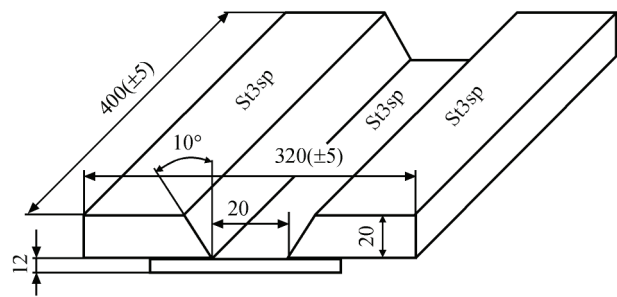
Butt joint preparation for cutting out weld metal samples in keeping with ISO 14171 requirements
